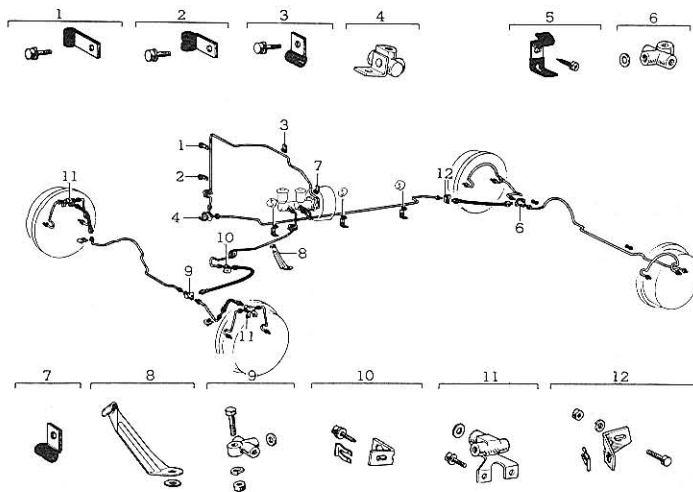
Brake Line Components, FJ40(L)(V)-OPT
